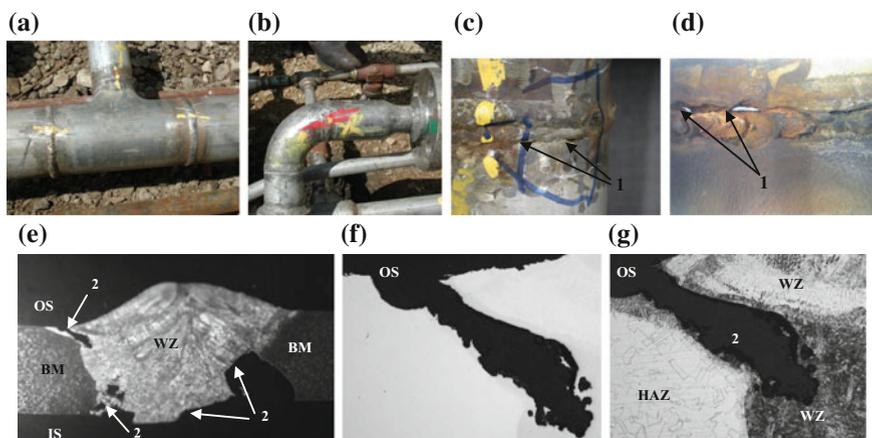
a, b General view of welded pipes. c, d Failed welds (with holes 1): c outer surface; d inner surface. e Macroscopic cross section of the weld: 2—location of corrosion; WZ—weld zone, BM—base metal, OS—external surface, IS—inner surface. f, g Metallography of weld in the location of failure ($\times 60$): f before etching. g after etching: HAZ—heat-affected zone
